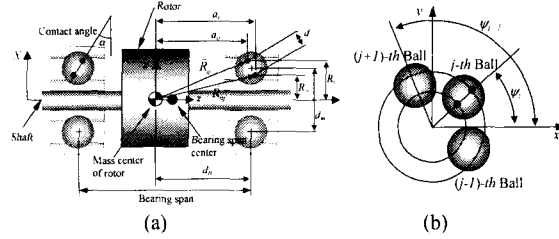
(a) Rigid rotor supported by two ball bearings in x-z plane (b) Ball bearing in x-y plane
